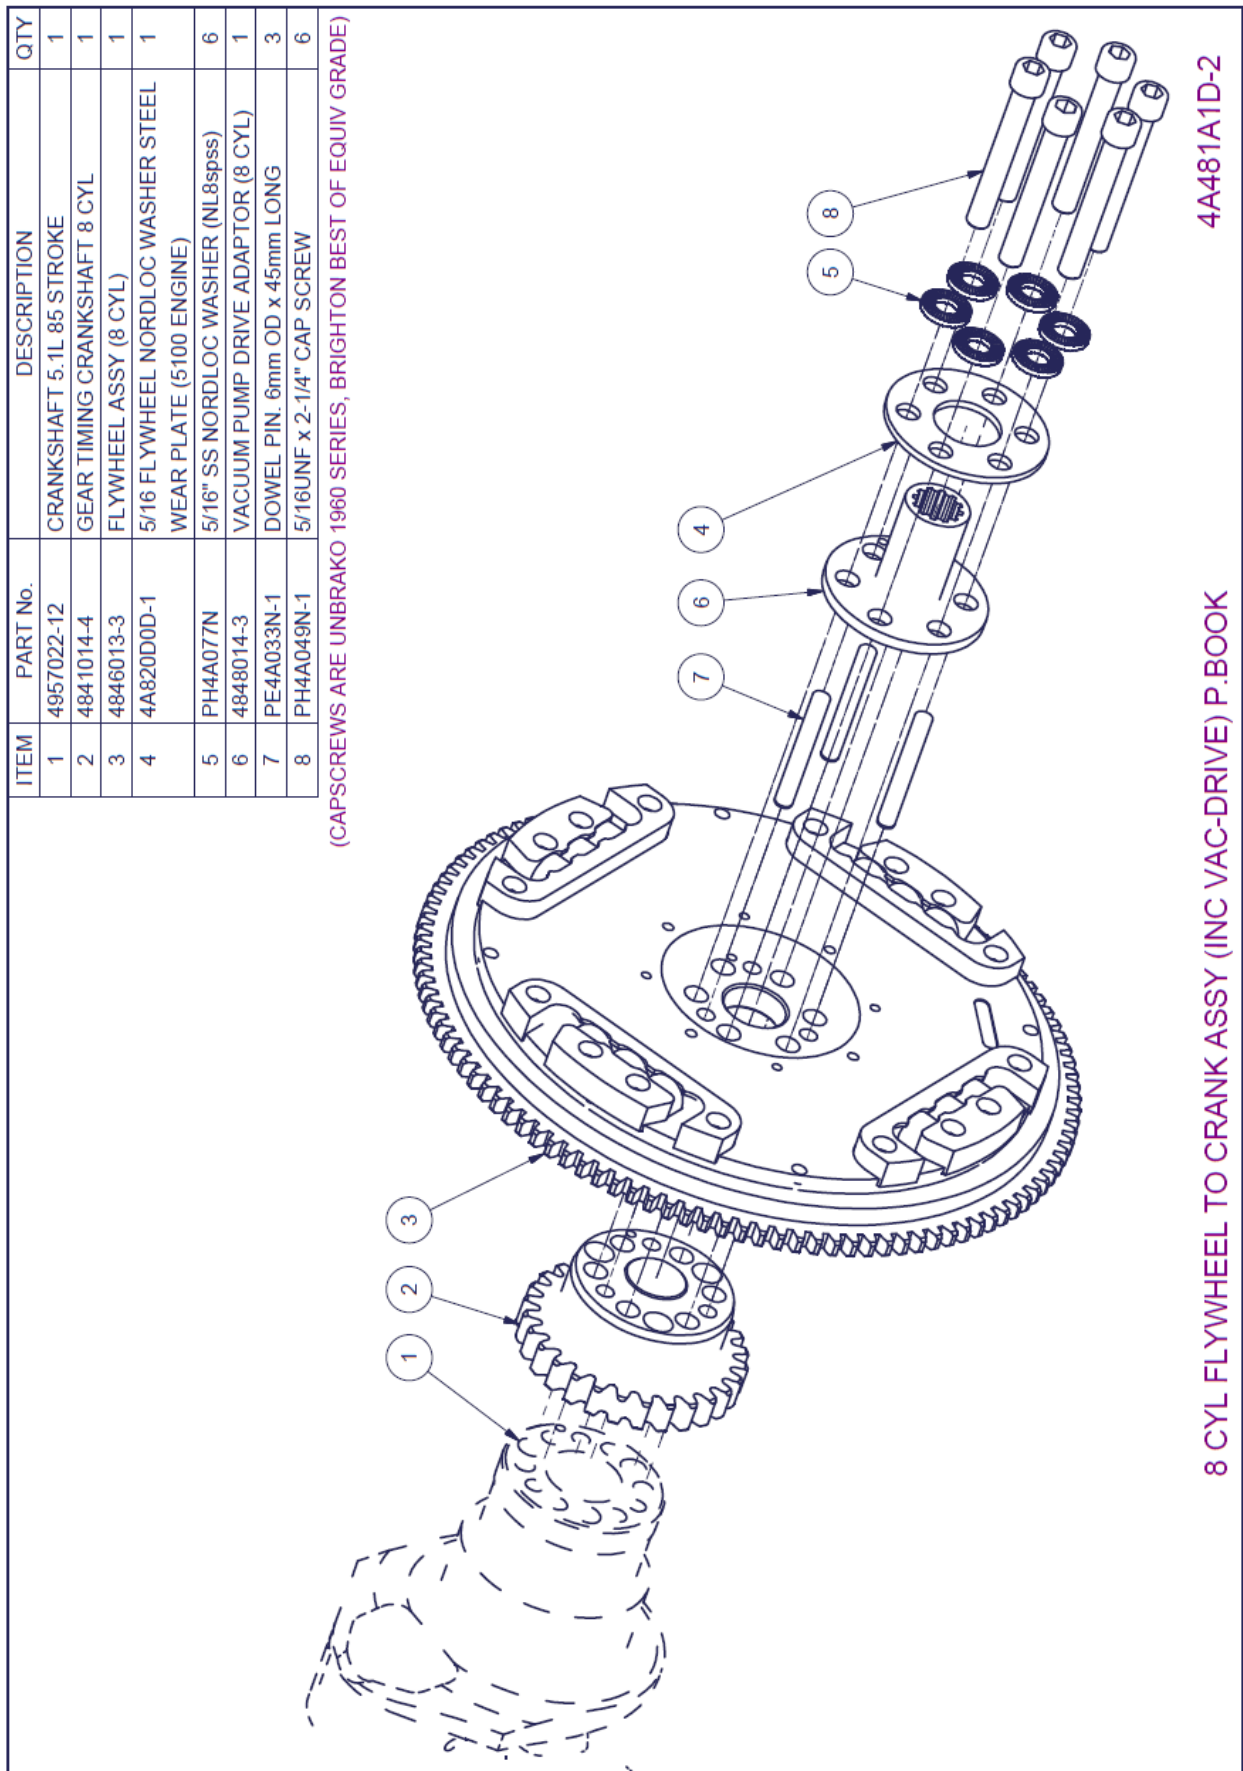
Crankshaft and Flywheel Assembly (with Vac-drive installed)
